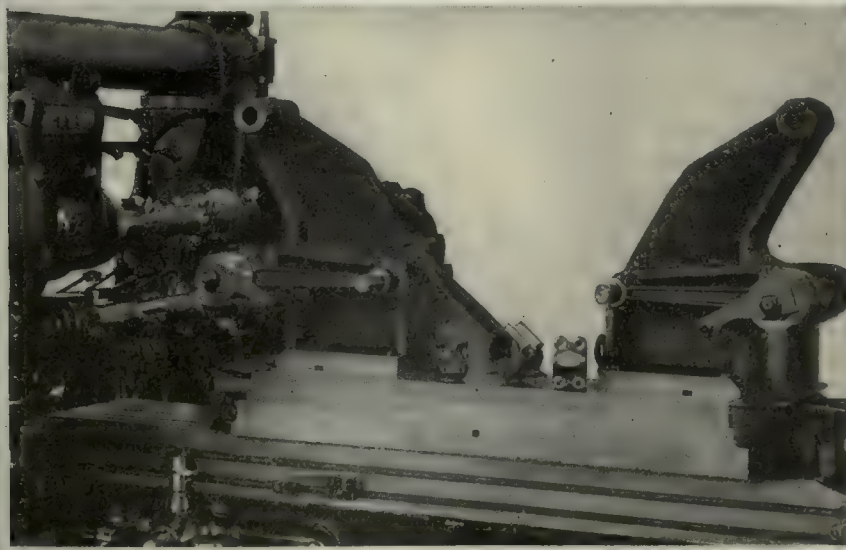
Milling between lugs on four-bolt rod. Note simple clamps. Swiveling fixture carries two rods at each end. The job is on a Cincinnati milling machine. Production time, 75 rods per hour.
